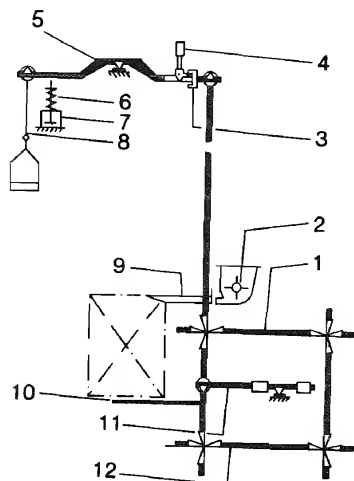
Diagram of a rotary packing machine with equal-arm weigh-beam
